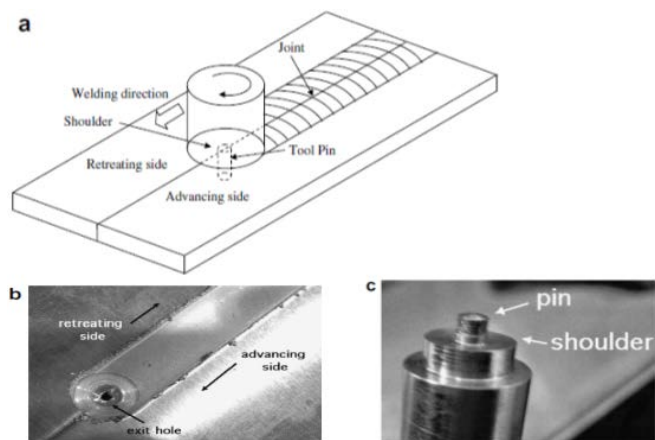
(a) Schematic illustration of (FSW) process; (b) FSW weld between aluminium sheets; (c) FSW cylindrical tool with a threaded pin [5]
